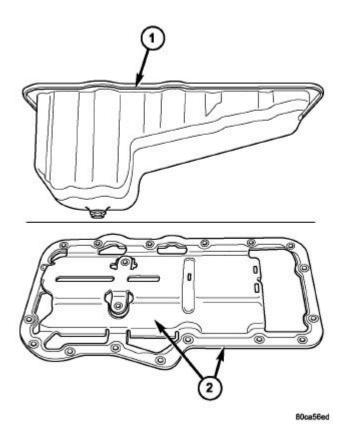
Identifying Engine Oil Pan Courtesy of CHRYSLER LLC
